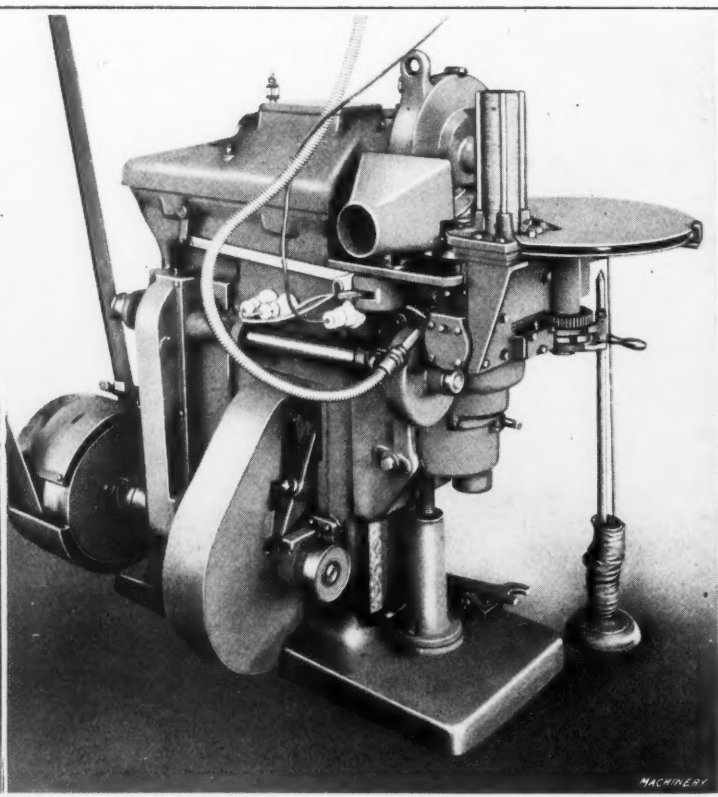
Another View of the Persons-Arter Automatic Piston-ring Grinder
